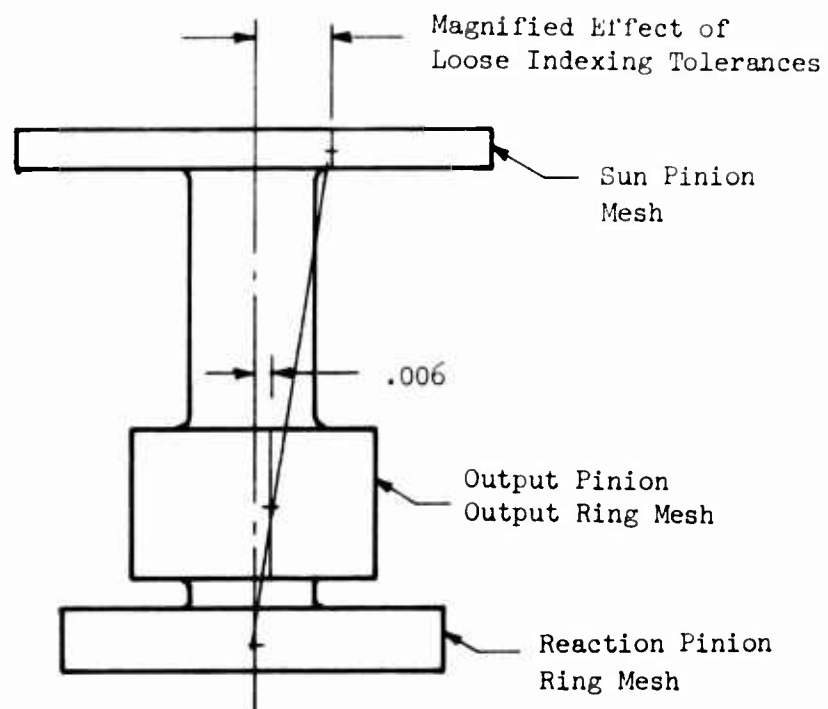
Pinion Shaft with Magnified Indexing Tolerances
